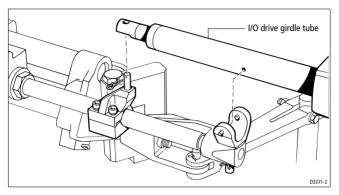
Fitting the I/O drive unit (Mercruiser 93/OMC/Yamaha)
